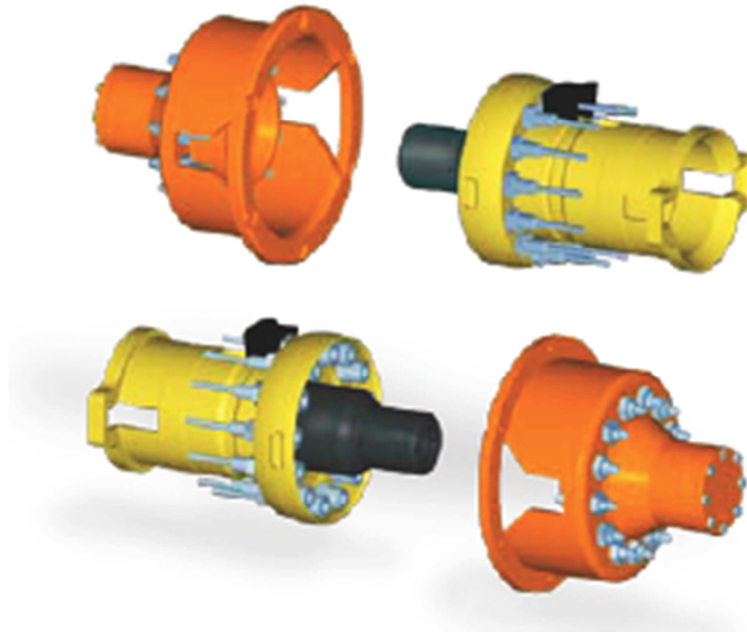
An example of Topside Umbilical Termination Assembly [Frame]
